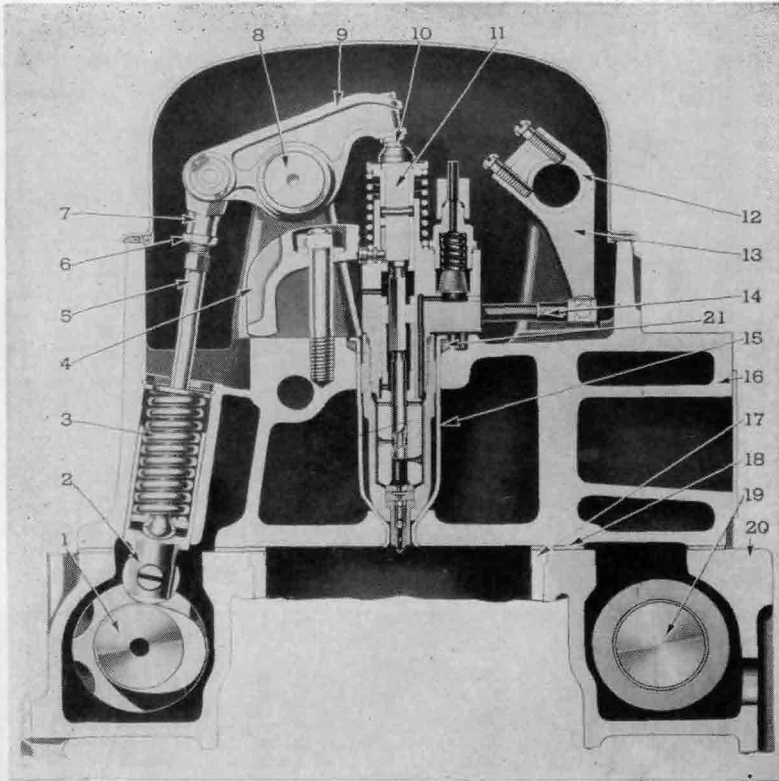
Mounting of fuel injector above the engine cylinder. (Detroit Diesel Engine Division of General Motors Corporation)
